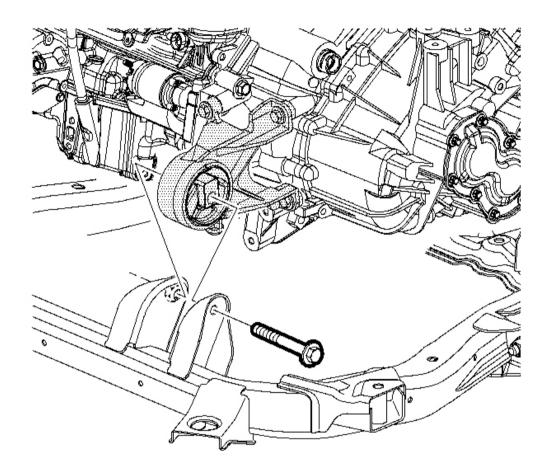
Front Transmission Mount Through Bolt Courtesy of GENERAL MOTORS CORP.
